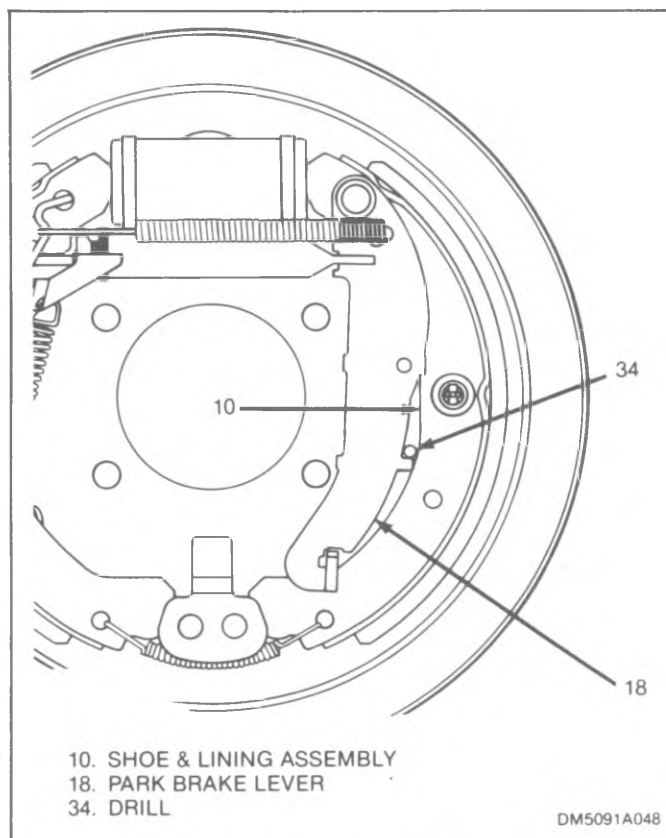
1986 LeSabre, Delta 88 and Bonneville Parking Brake Adjustment
